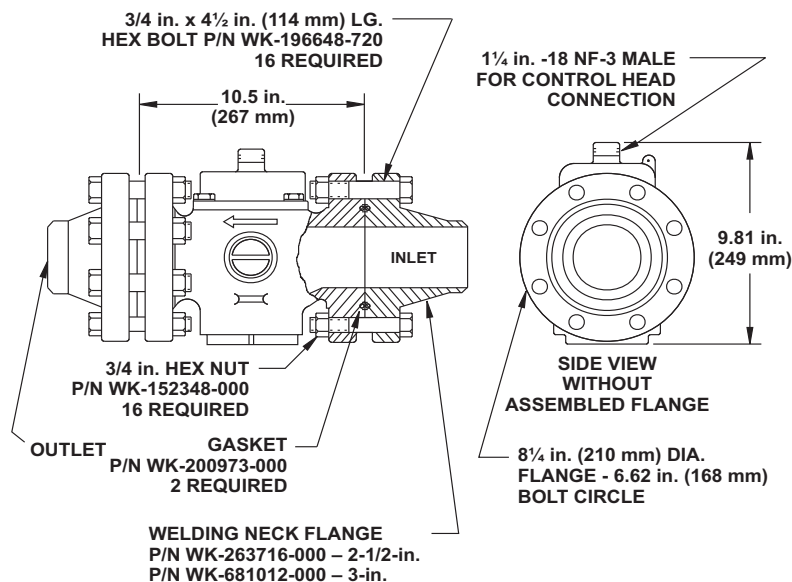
3 in. (2 1/2 in.) Stop (Direction) Valves
